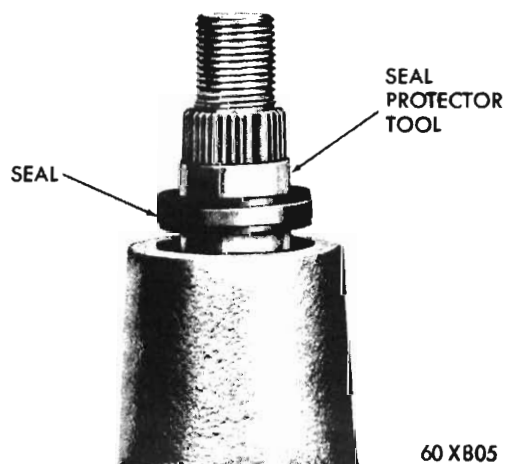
Sector shaft oil seal protector (Tool E19C20A)
